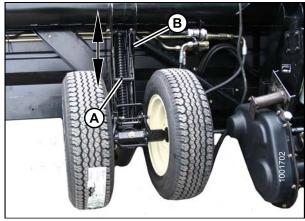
Left Wheels Shown – Right Wheels Similar
